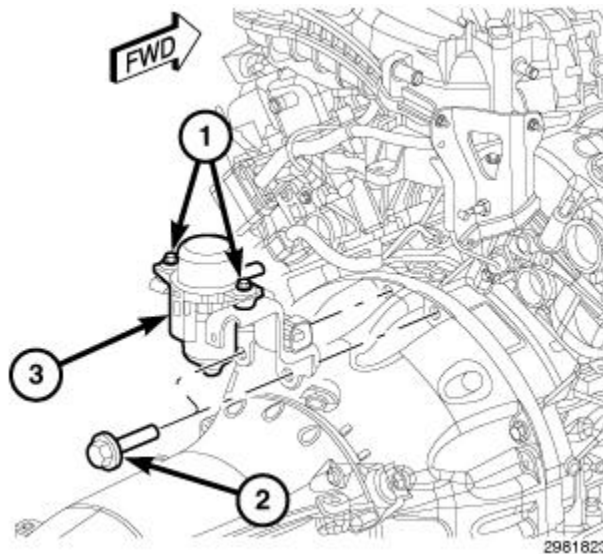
Electric Vacuum Pump, Bolts & Studs
